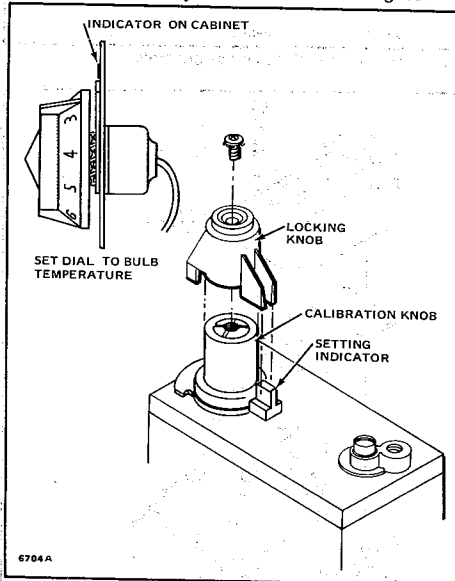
Calibrating V504/V524 with dial mounted on cabinet.
